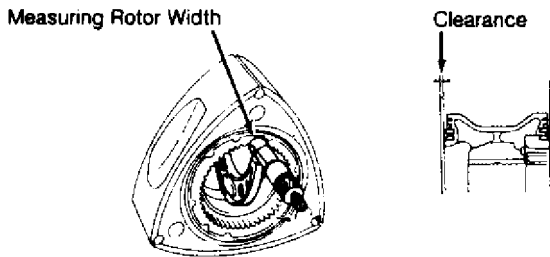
Measuring Rotor-to-Side Housing Clearance
